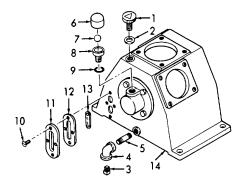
Oil Filler Cap, Breather Cap, Plug, and Sight Gage, Removal.
